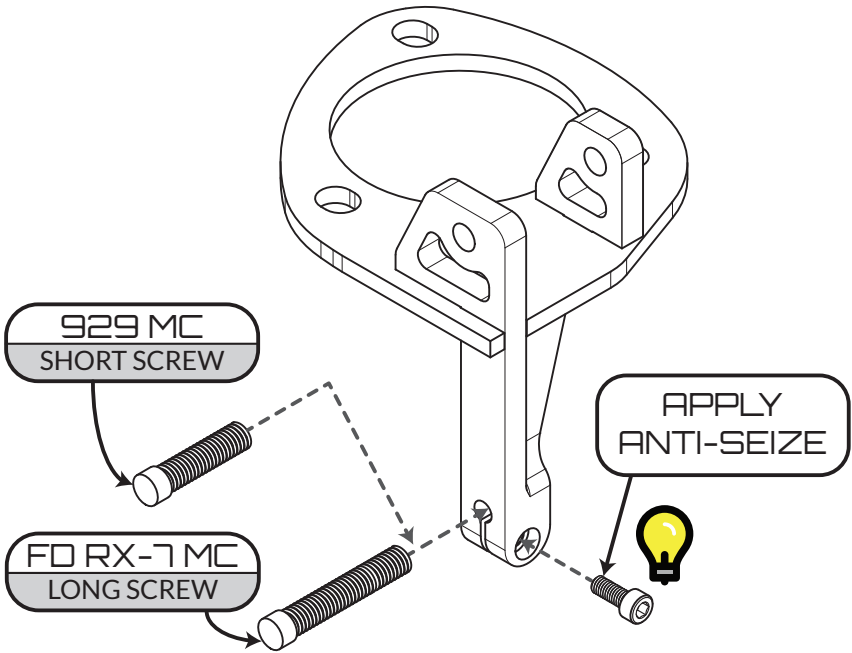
Installing the Strut Tower Plate MC Brace Hardware
